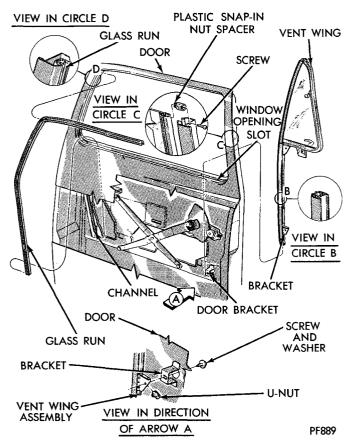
Vent Wing and Glass Run Assembly REAR VIEW MIRROR (D-W-1-2-3)
